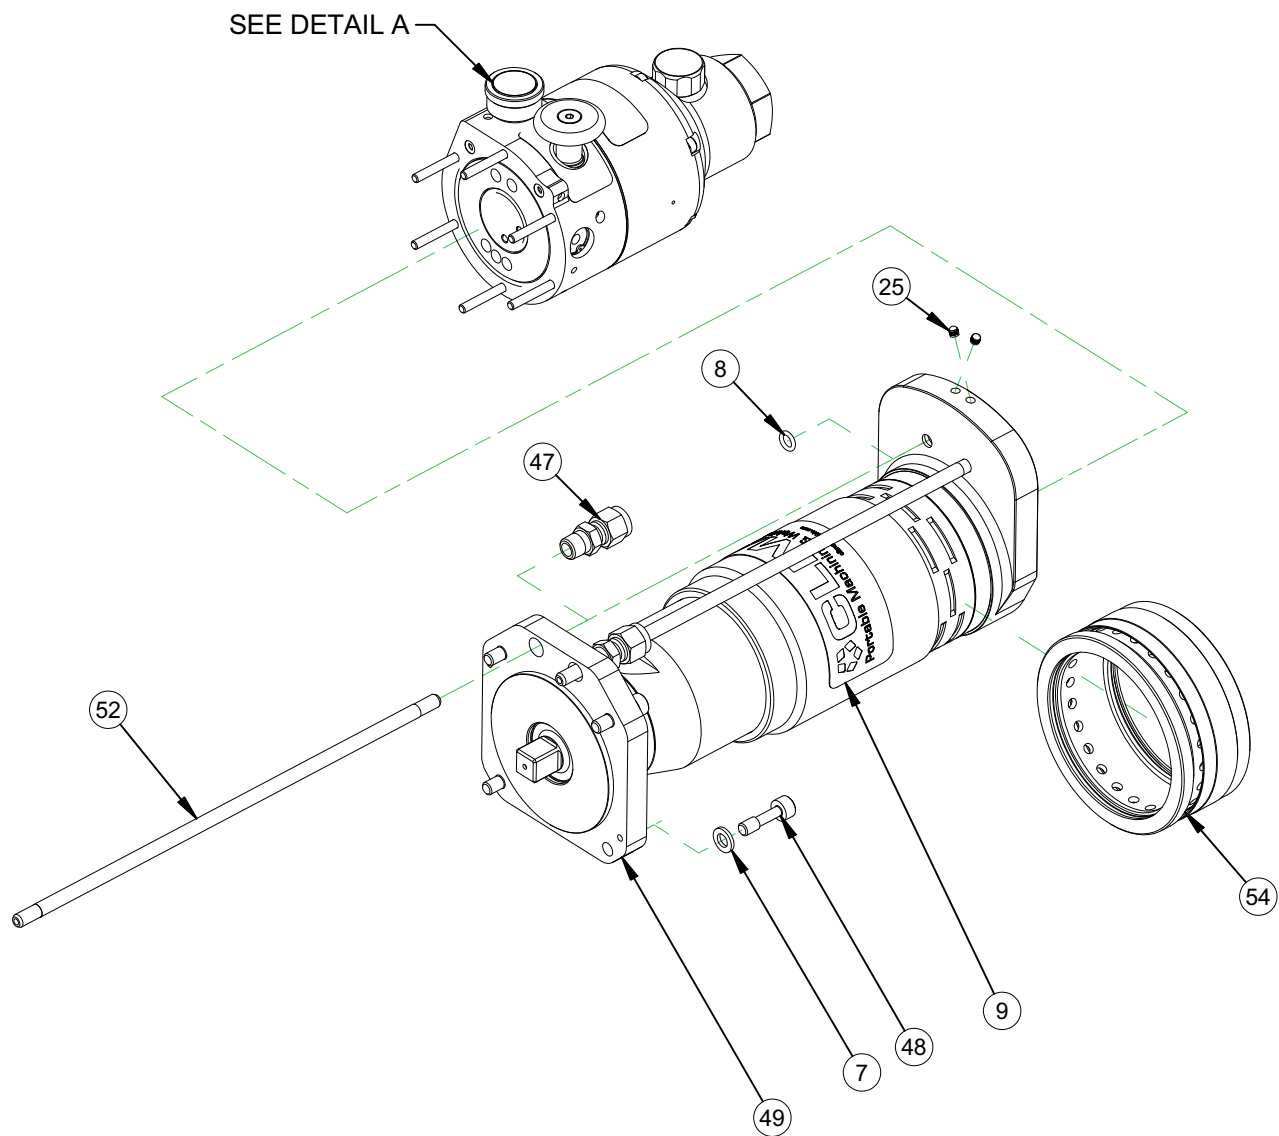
P/N 85624 PD3000 AIR MOTOR ASSEMBLY WITH CONTROLS
